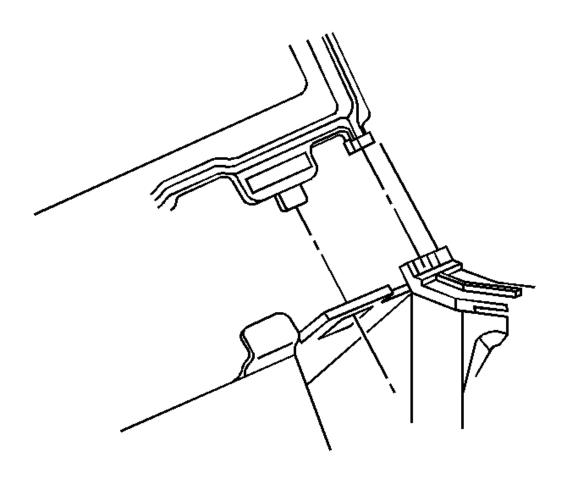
Aligning Intake Manifold Gasket Tabs Courtesy of GENERAL MOTORS CORP.
